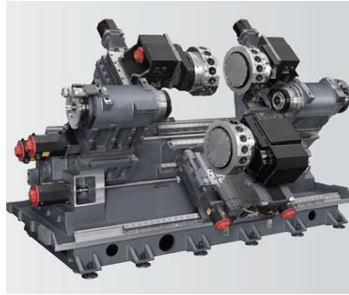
A real example of a machine with multiple spindles and turrets [5].
